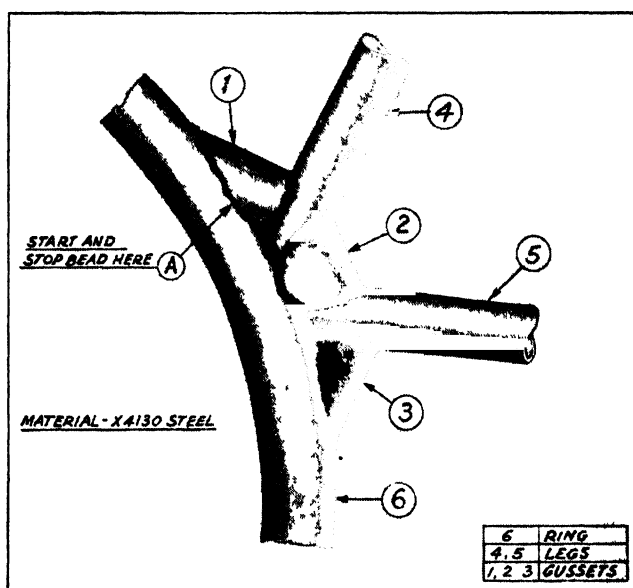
Section of engine mount ring assembly showing box-type gussets.
